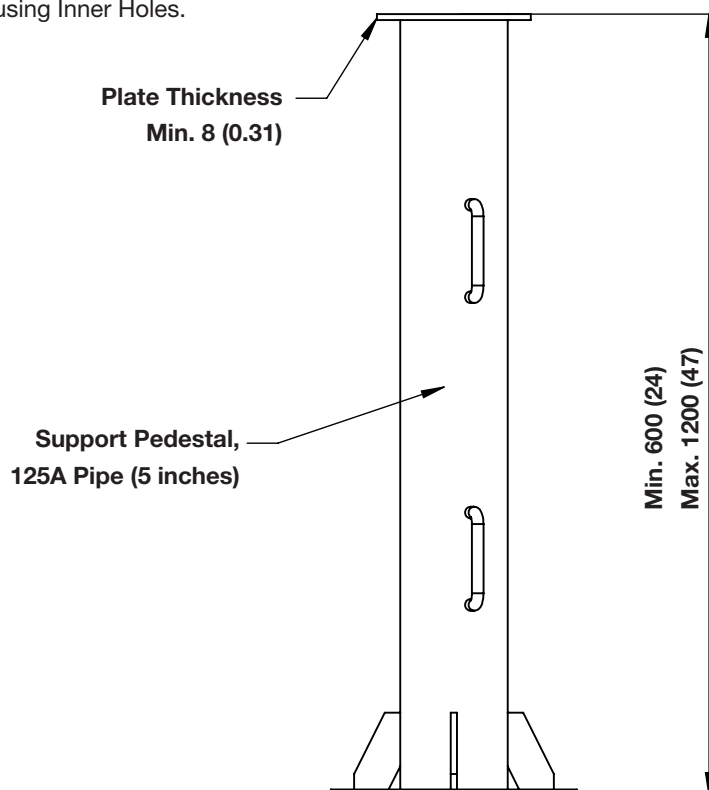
Recommended Mast Design using Inner Holes (with M6 Bolts)
